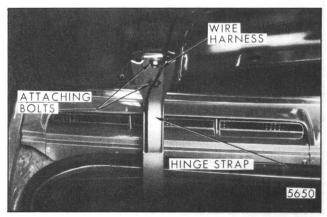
Typical Rear Compartment Hinge to Lid Attachment - Buick "E" Shown
